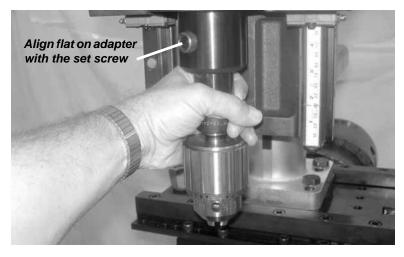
Insert the MT #3 adapter into the spindle. Align the flat on the adapter with the spindle set screw.
